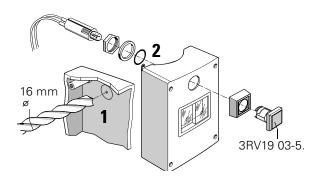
Indicator light installation in a molded-plastic housing (example: frame size S00)
